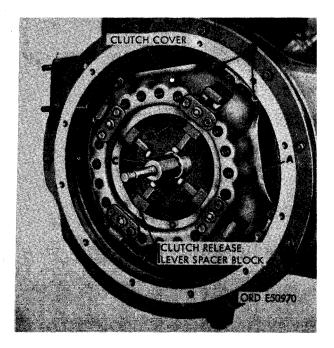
INSTALLING CLUTCH DRIVEN MEMBER ASSEMBLY USING UNIVER-SAL ALINEMENT TOOL.
